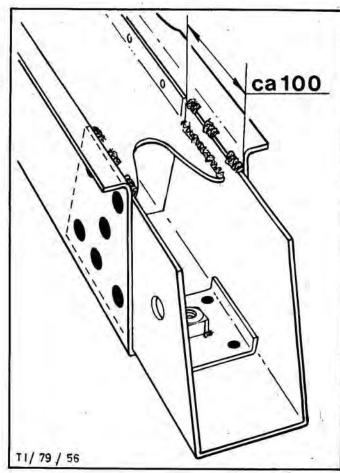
Weld locations on shoe and weld nut retaining plate. Shoe welded in reinforcement plate approx. 100 mm right and left.
